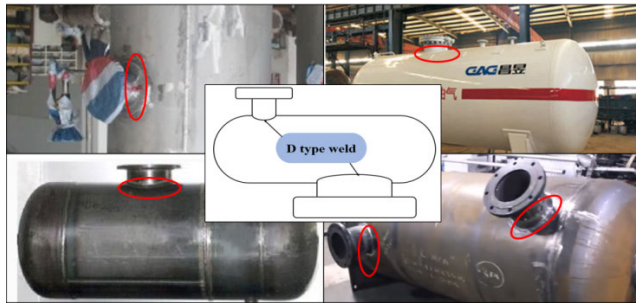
Space sealing welds to pressure vessels (D-type welds).
